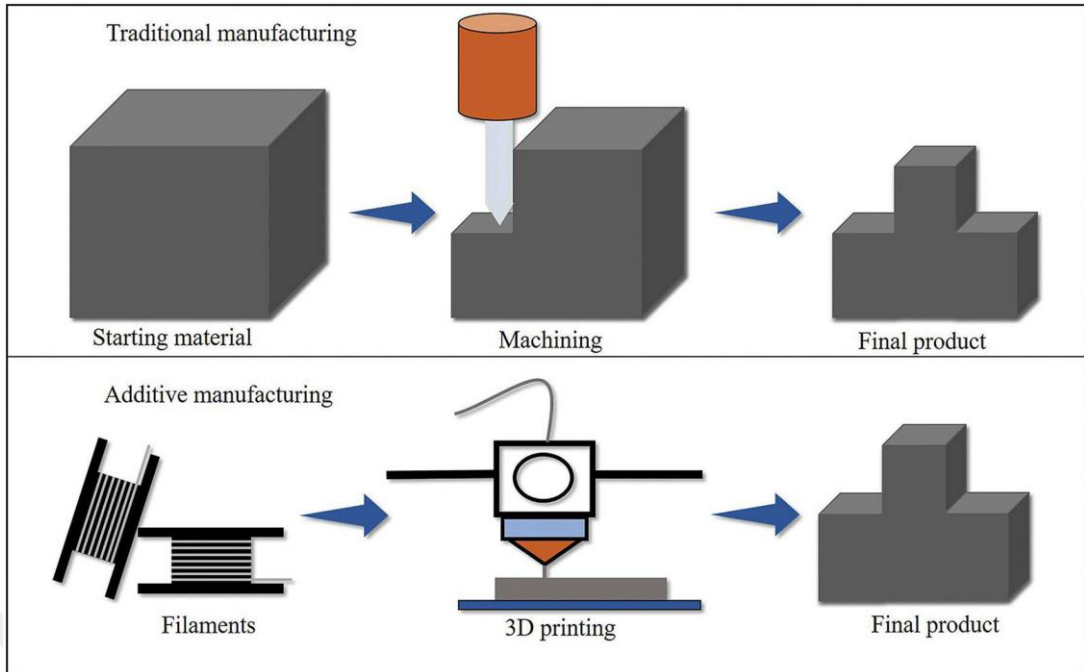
Comparison Between Traditional Manufacturing Technique and Additive Manufacturing [29]
